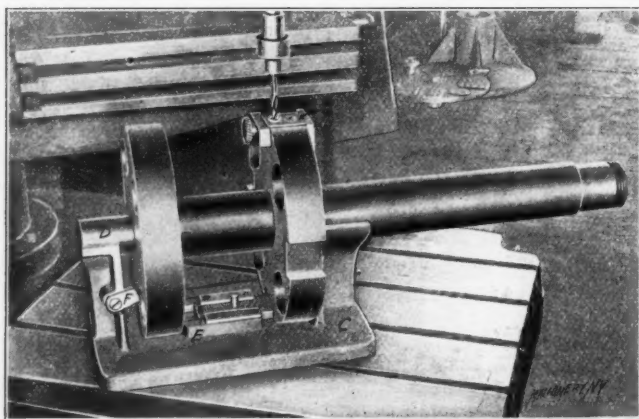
Drilling the Screw Holes for Holding the Indexing Blocks and the Filling Pieces.
